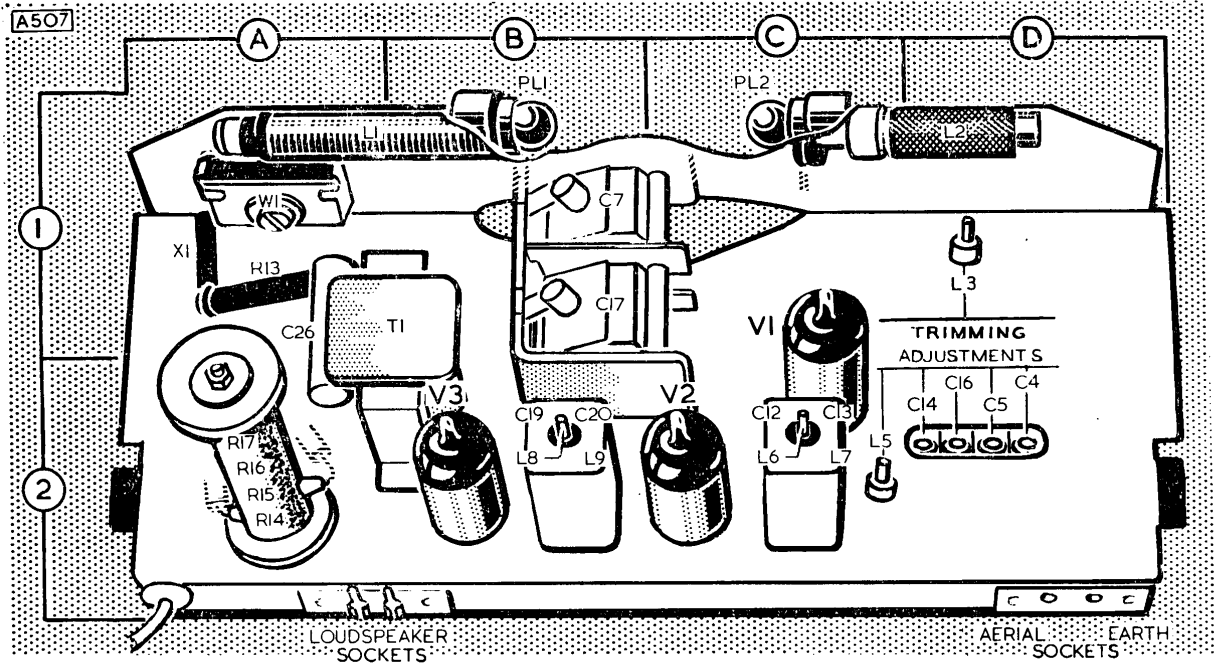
Plan view of receiver chassis, showing locations of valves and components.
